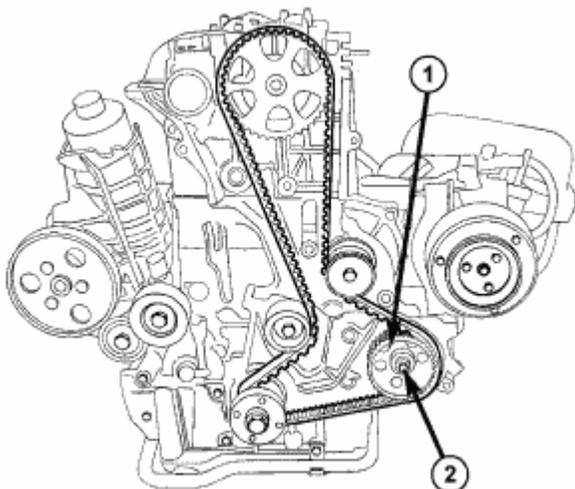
Identifying Injection Pump Sprocket Mounting Nut & Sprocket
